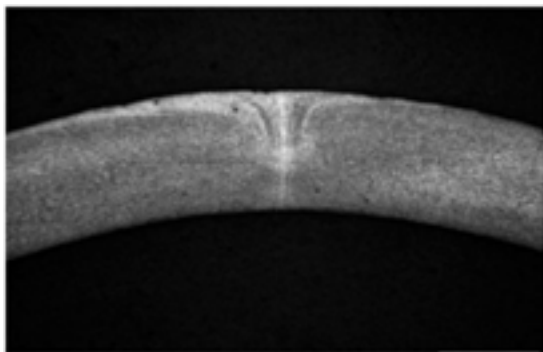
Extrusion seam weld (longitudinal weld)
